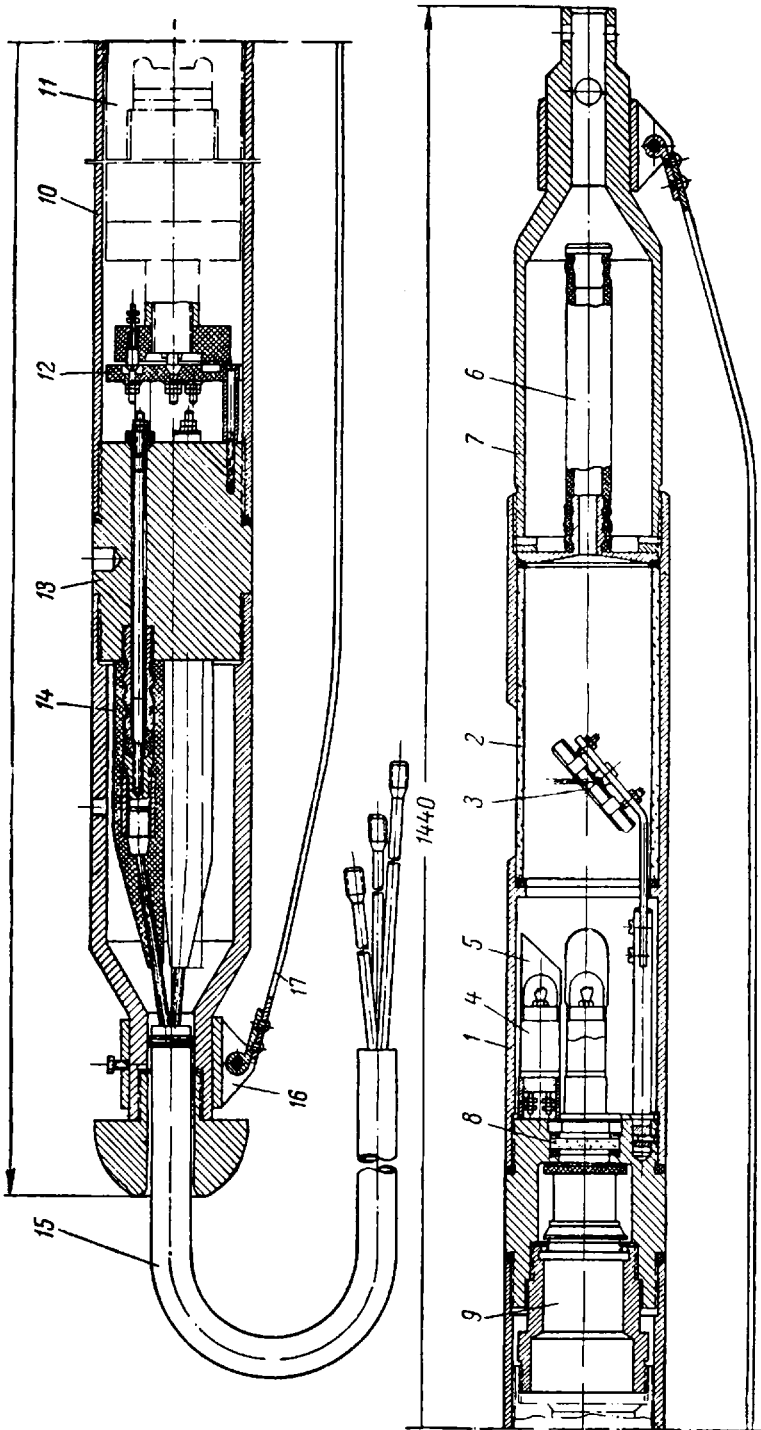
General view of well camera. 1—body of optical attachment; 2—glass; 3—mirror; 4—bulbs; 5—hoods; 6—pressure compensator; 7—casing of compensator; 8—protective window; 9—objective; 10—body of film-winding mechanism; 11—film-winding mechanism; 12—plate with contacts; 13—light bridge; 14—terminal; 15—cable; 16—holder; 17—spring.
